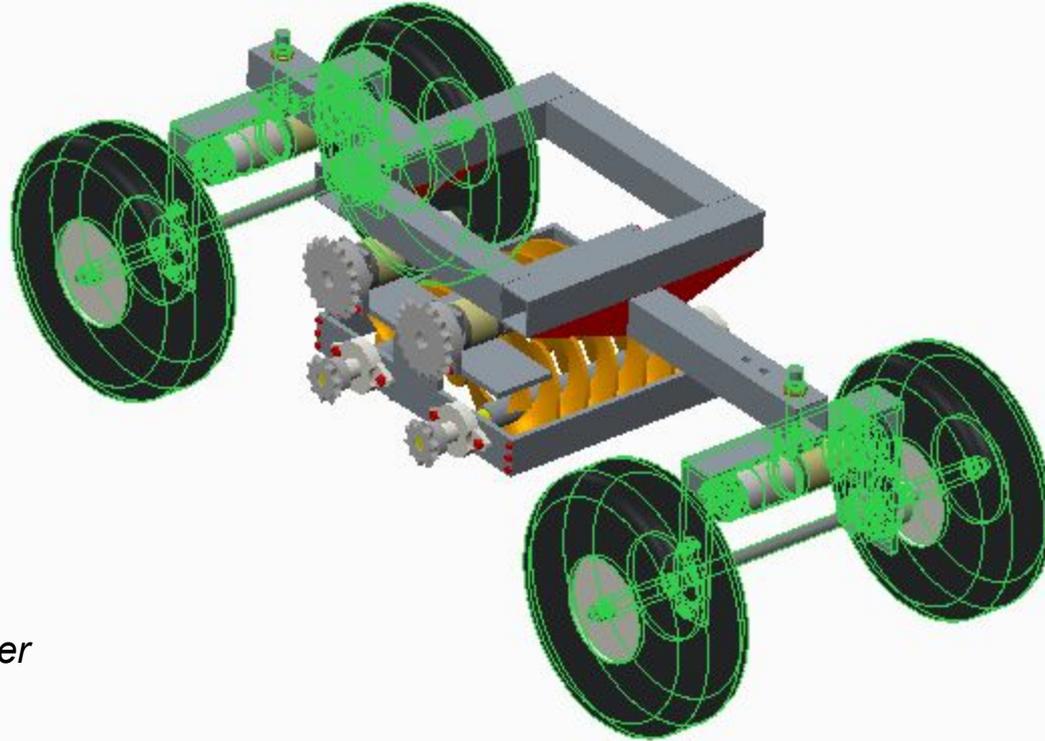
Robo-Weeder with Highlighted Drive Mechanism.
